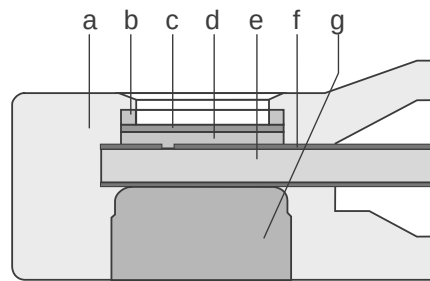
Cross section through a Honeywell ISFET probe for process applications: (a) sensor tip with PPS body; (b) EPDM seal; (c) ISFET chip; (d) reverse side conductive seal; (e) printed wiring board; (f) connecting wires; (g) conductive plug (counter electrode).
